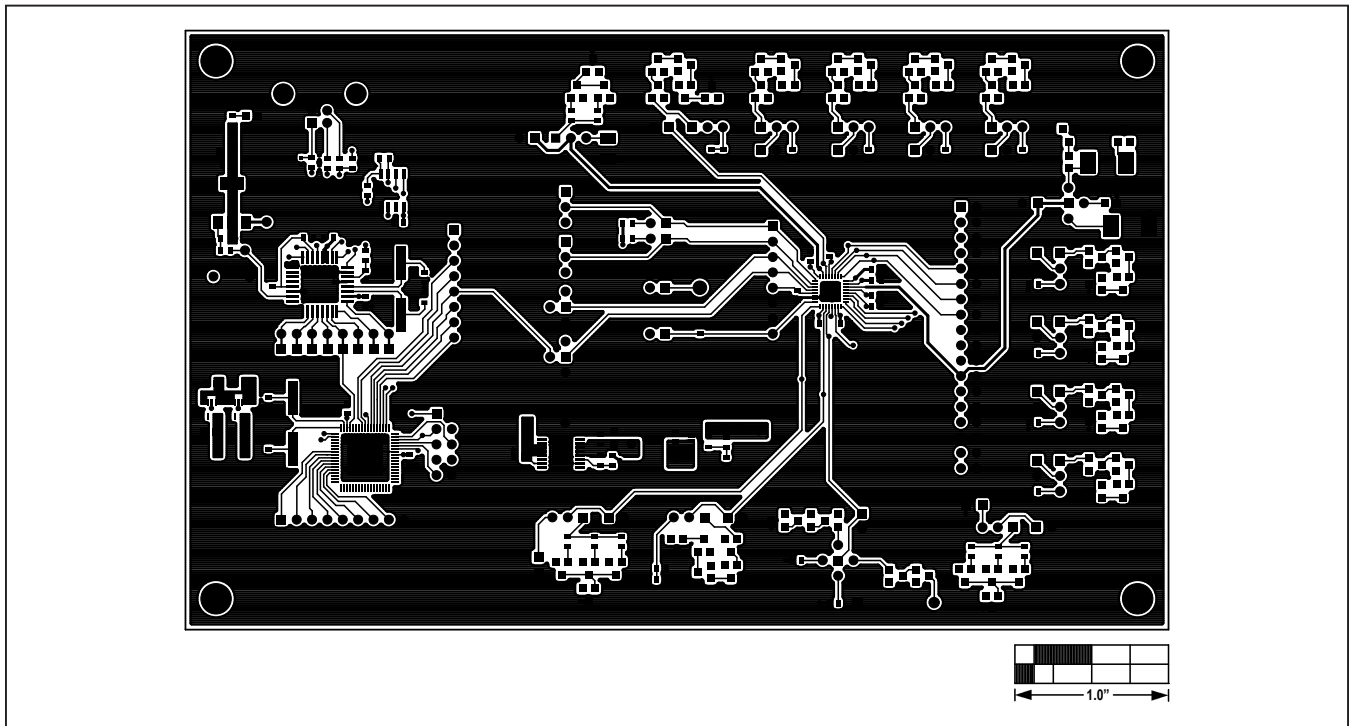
MAX5110 EV Kit PCB Layout—Component Side
